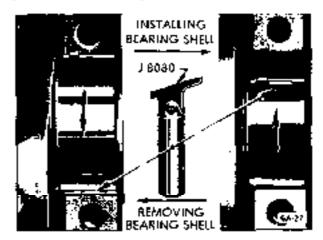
A-27 Removing and Installing Crankshaft Bearing Upper Shell
